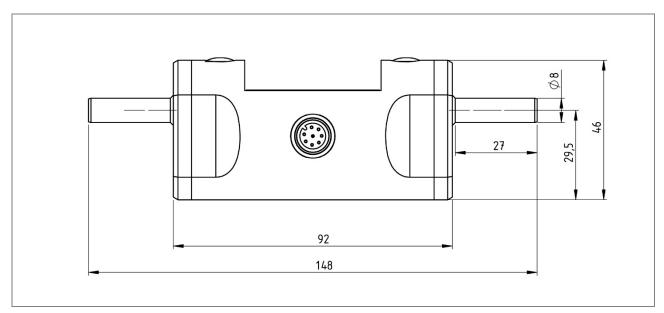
Dimensions SONOFLOW® IL.52/3 V2.0 - Side view
